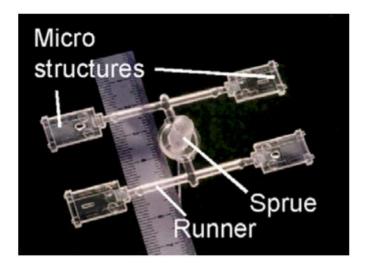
Typical batch of micro structures as it comes from an injection-molding machine.
